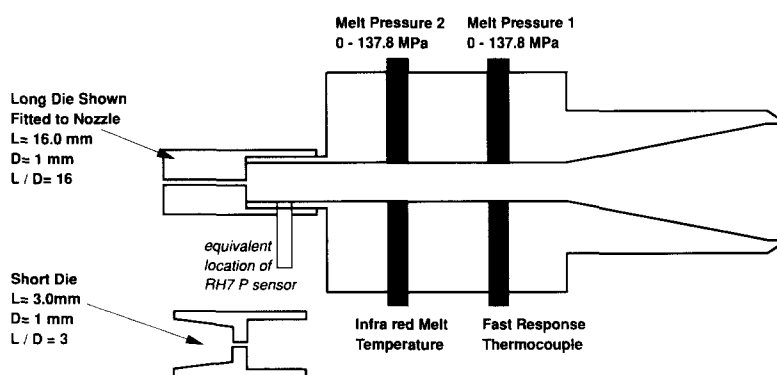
Schematic diagram of the modular nozzle rheometer used with the Sandretto injection moulding machine
